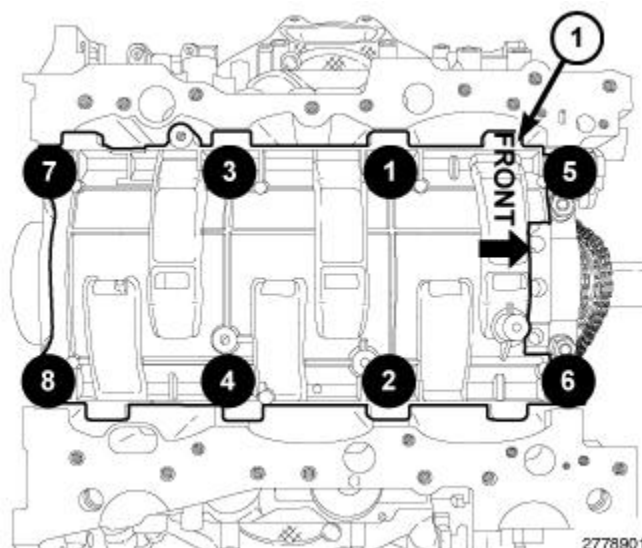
Windage Tray With Main Bearing Cap Bolts Installation Sequence
